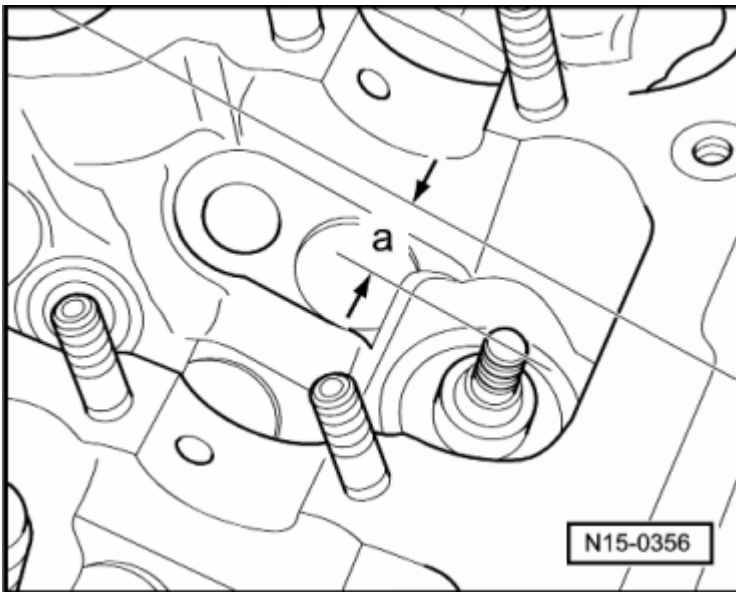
Identifying Distance Between End Of Valve Stem And Upper Edge Of Cylinder Head
